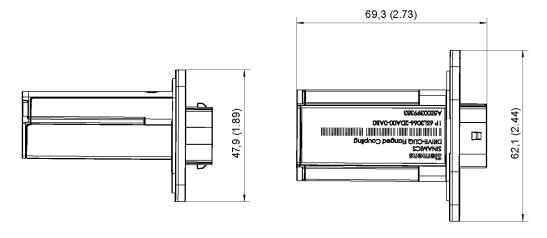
Dimension drawing of the DRIVE-CLiQ cabinet gland, all dimensions in mm and (inches)
